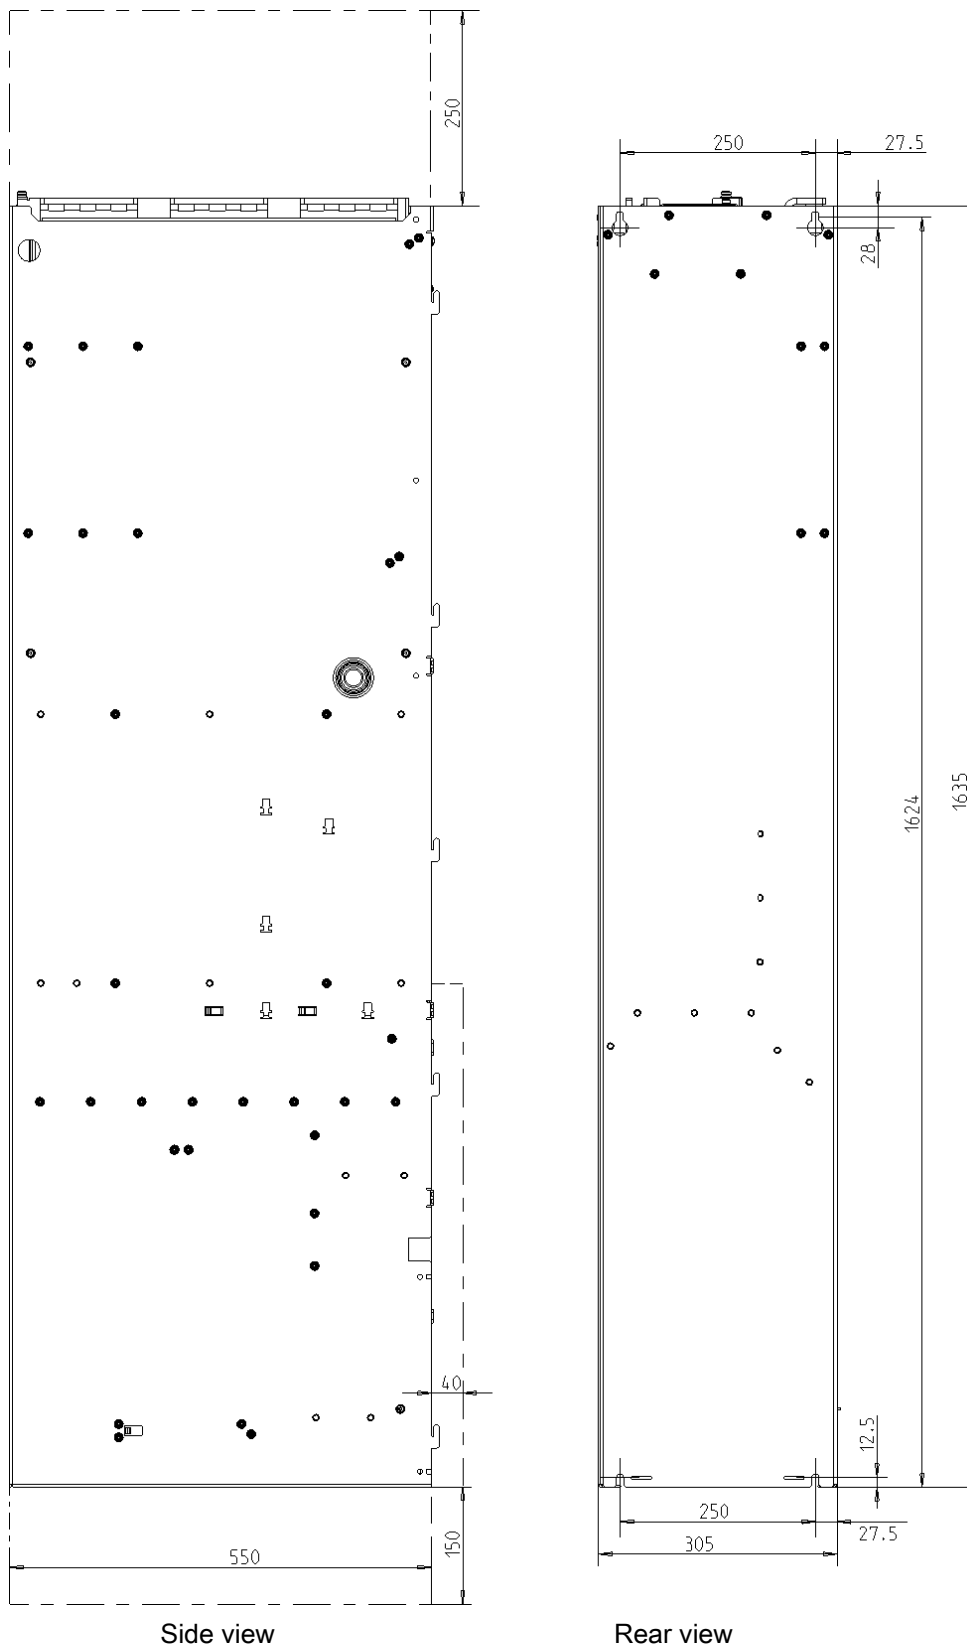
Dimension drawing of Basic Line Module (type GB)
